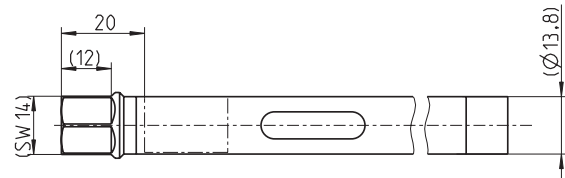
Mounting wrench $\varnothing 13.8$ /SW14 Type 1300A67 for mounting bore $\varnothing 14$ mm
